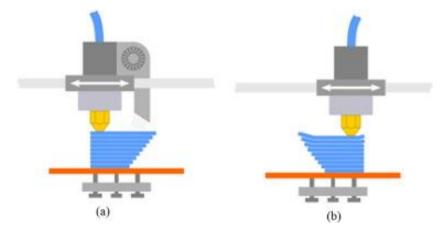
Schematic of the layer deposition process in 3D printing: (a) With part cooling fan, and (b) Without part cooling fan
